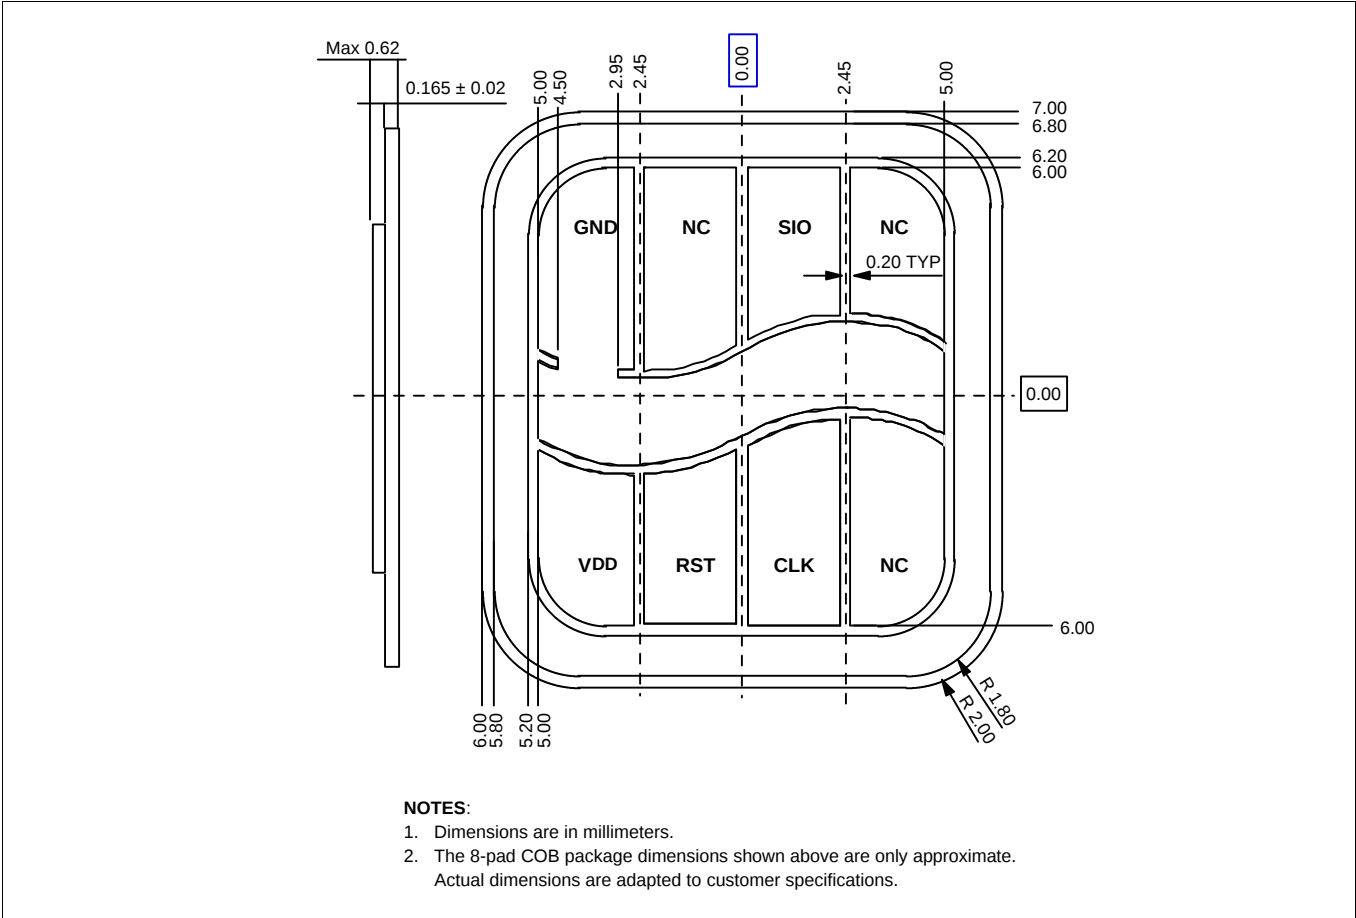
Mechanical Dimensions for 8-Pad COB Package
